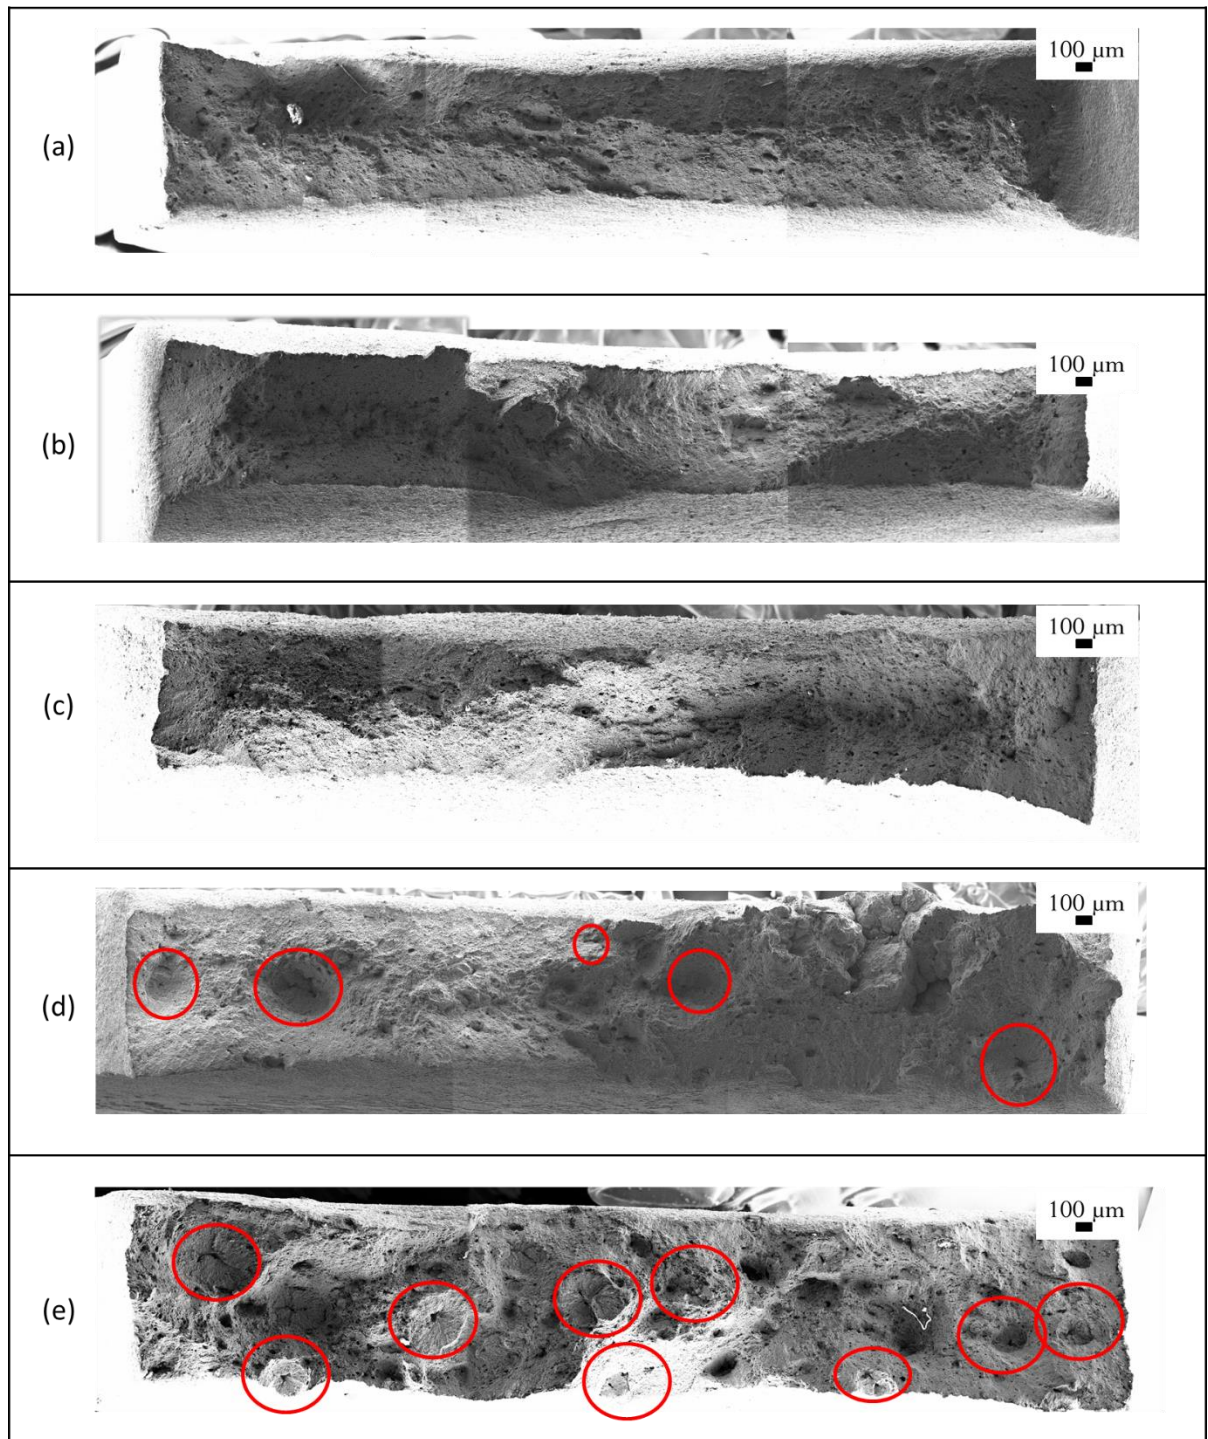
Fracture surfaces after tensile tests at a strain rate of $3 \times 10^{-4} \text{ s}^{-1}$. (a) uncharged forged specimen (b) uncharged cast specimen (c) forged specimen pre-charged in a 5% NH_4SCN solution heated at 50°C . These three fractographs shows a typical ductile fracture. (d) cast specimen pre-charged in a 5% NH_4SCN solution heated at 50°C and (e) cast specimen pre-charged in a 1% NH_4SCN solution heated at 50°C . The red circles present the detected fish-eyes.
